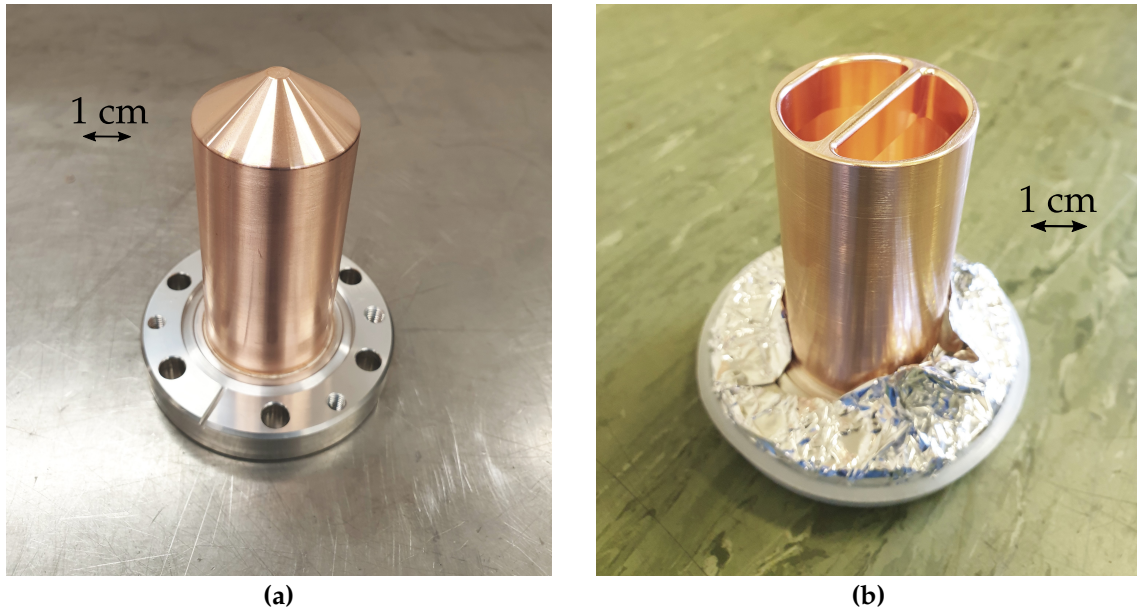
Photographs of a machined tuner (a) and vacuum pumping port (b).
